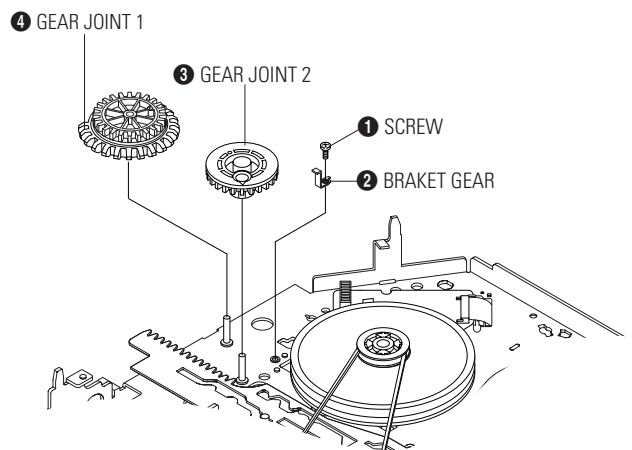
Bracket Gear, Gear Joint 1,2 Removal
